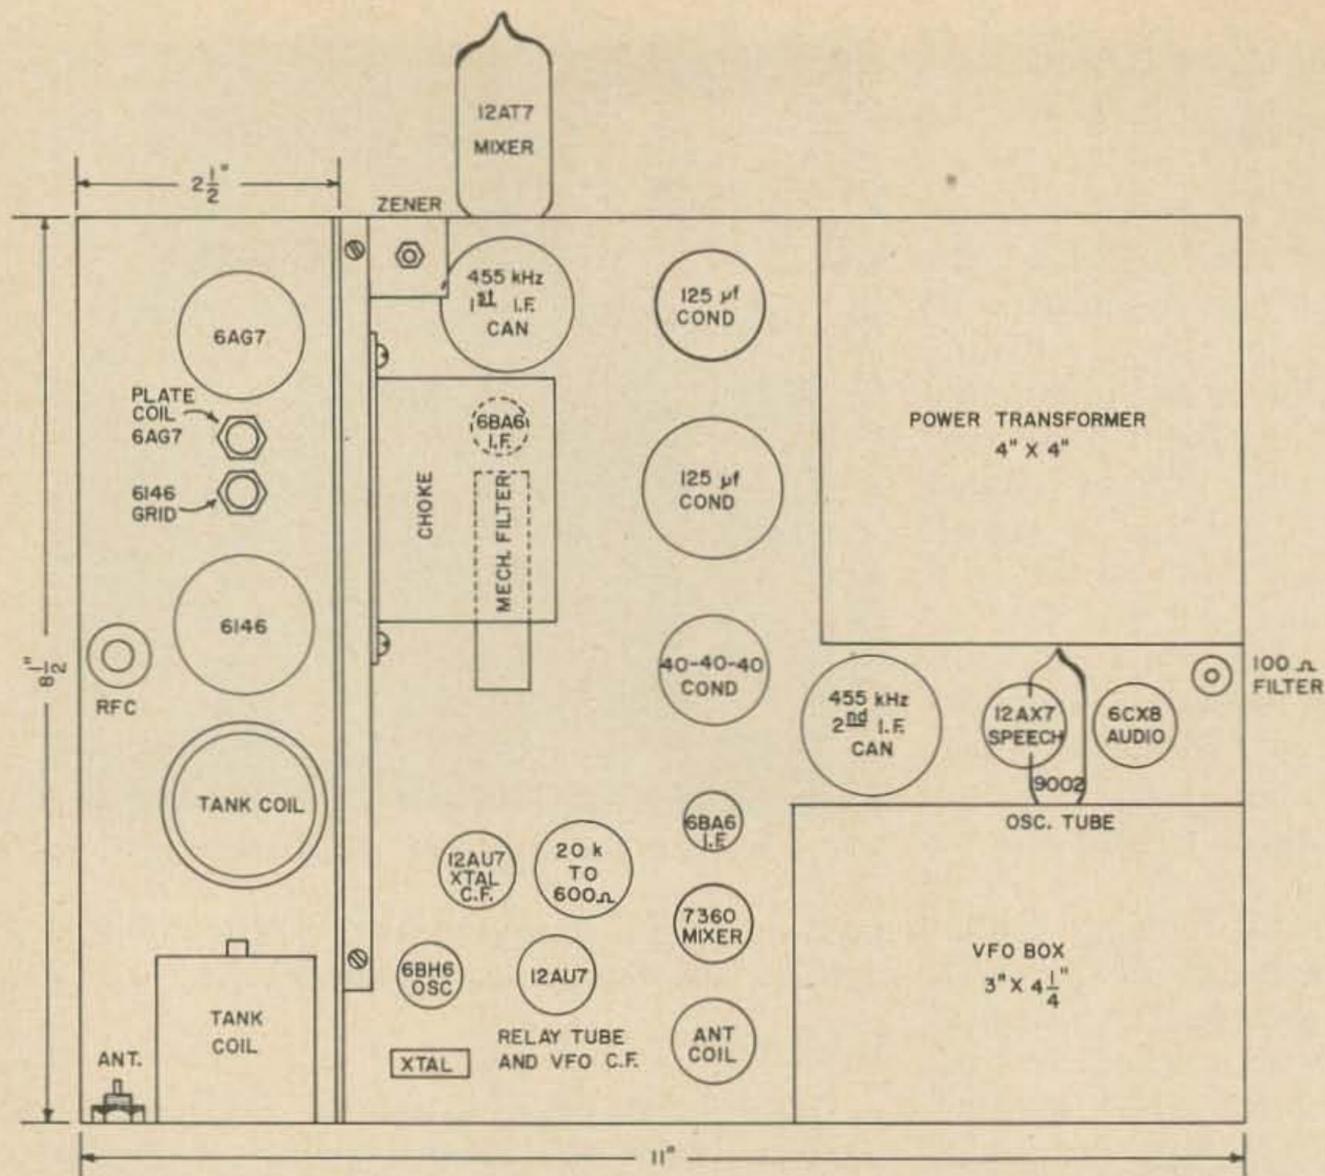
Layout of El Mariner as built by Ed Marriner W6BLZ.
